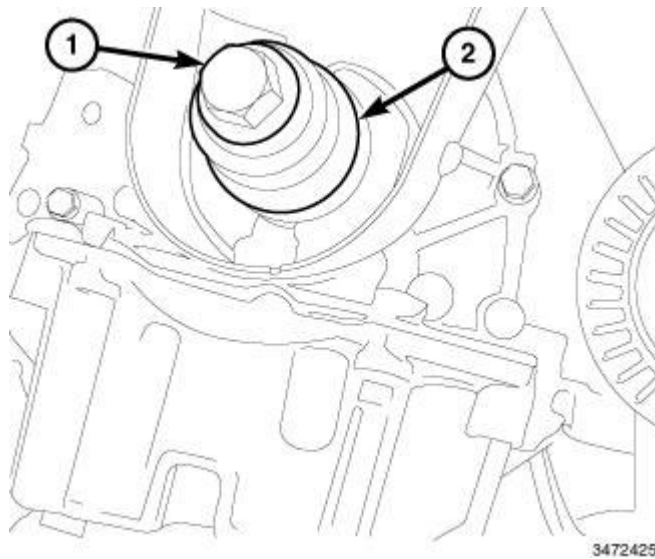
Crankshaft Sprocket Bolt & Oil Seal
